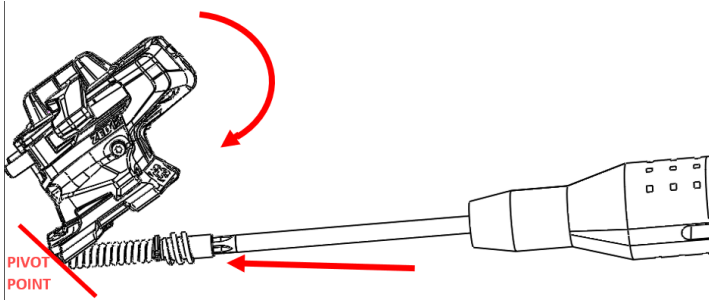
To pry the spring out, push the screw forward while rotating the turret as shown. Use a table as support to pivot about.
